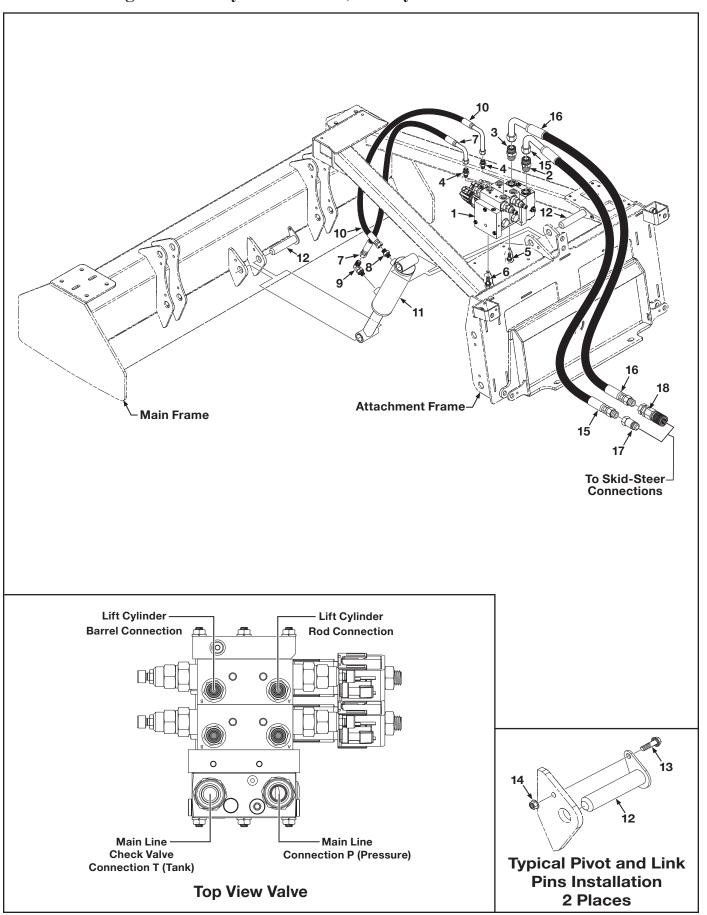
Hydraulic Valve, Lift Cylinder & Related Parts
